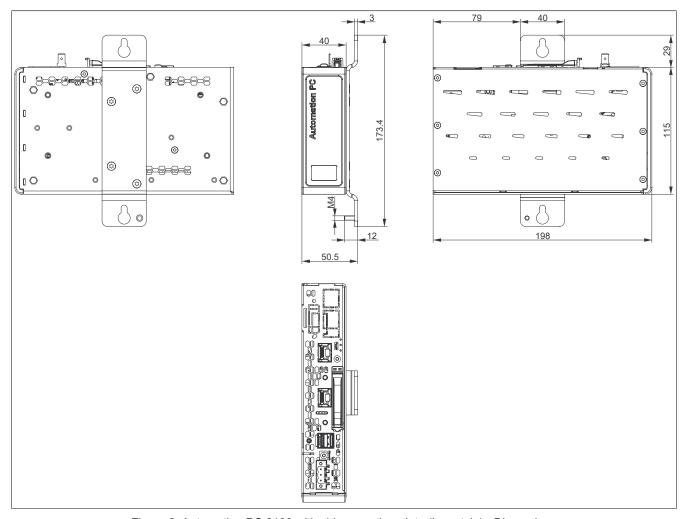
Automation PC 2100 with side mounting plate (box style) - Dimensions
